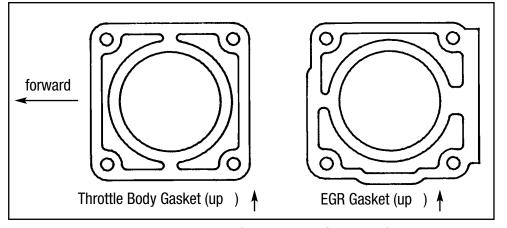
Throttle Body Gasket and EGR Plate Gasket
